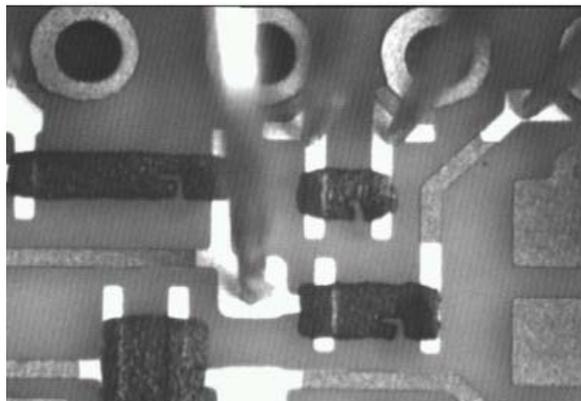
Photograph of Laser Trimmer Probes on a Trimmed Circuit (Courtesy of ESI)
